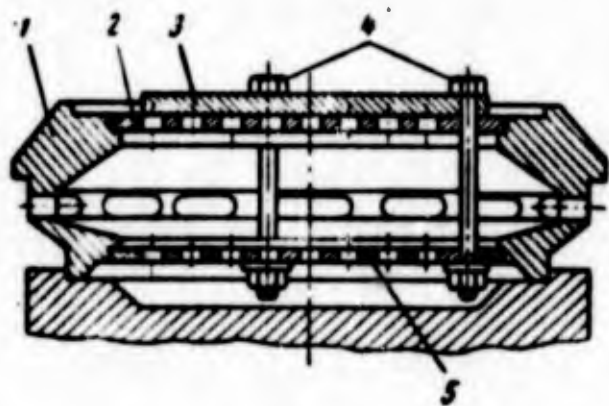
Welding of middle dome with head casing. 1) head casing; 2) middle dome; 3) cover disk; 4) bolts; 5) flame dome.
